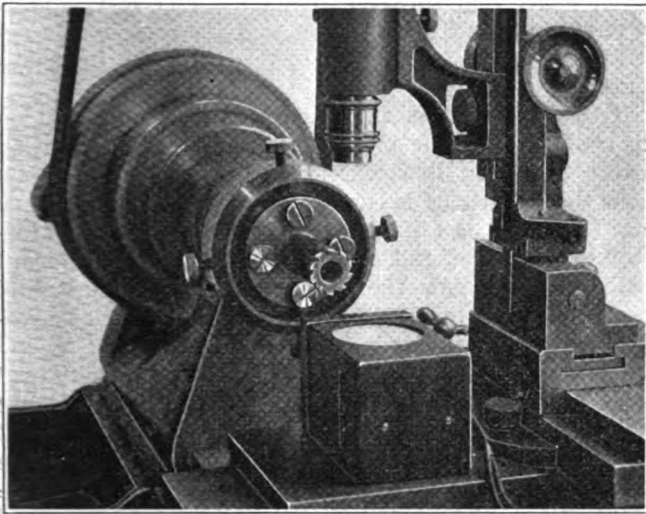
CUTTER MOUNTED FOR GRINDING THE HOLE
